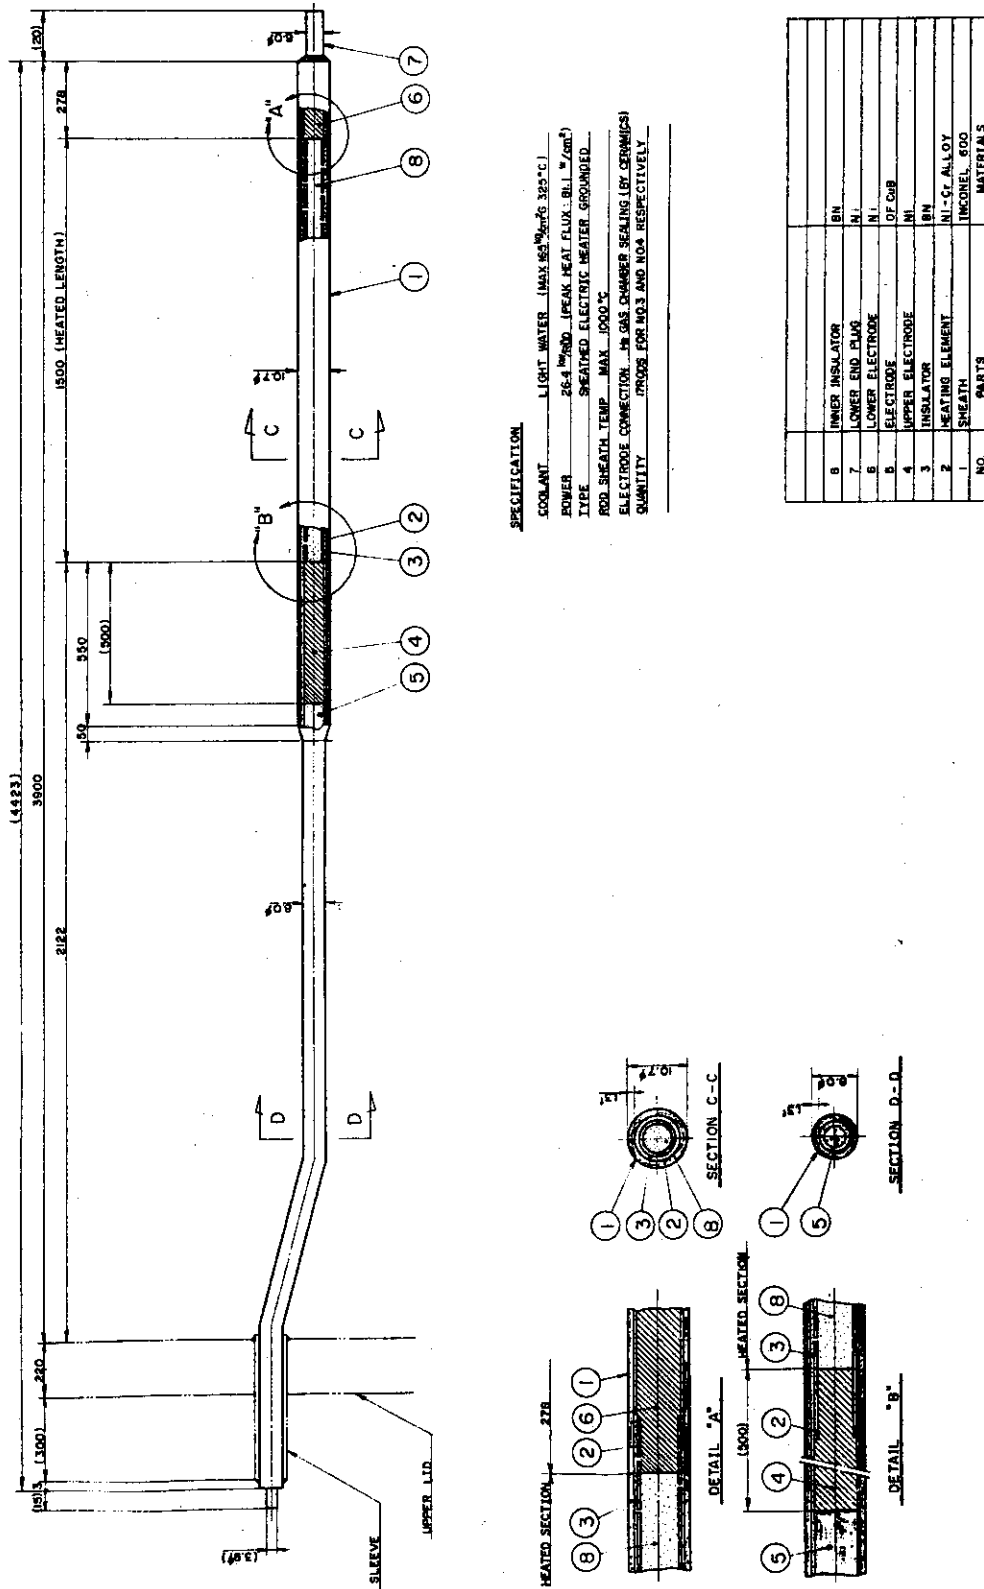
Structure of Heater Rods in No.4 Assembly
